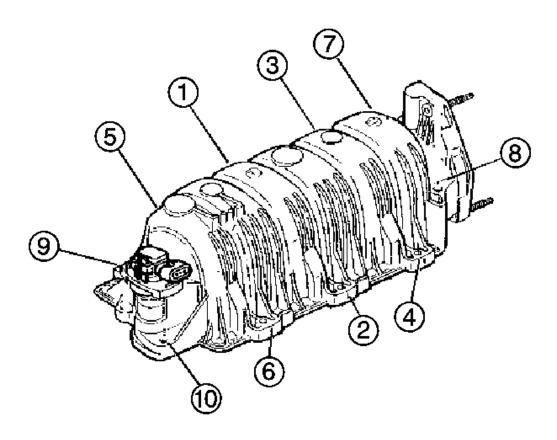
Upper Intake Manifold Bolts & Studs Courtesy of GENERAL MOTORS CORP.
